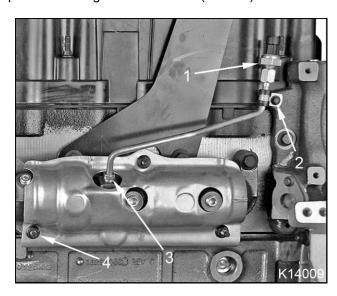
EBP tube assembly and front exhaust manifold heat shield
